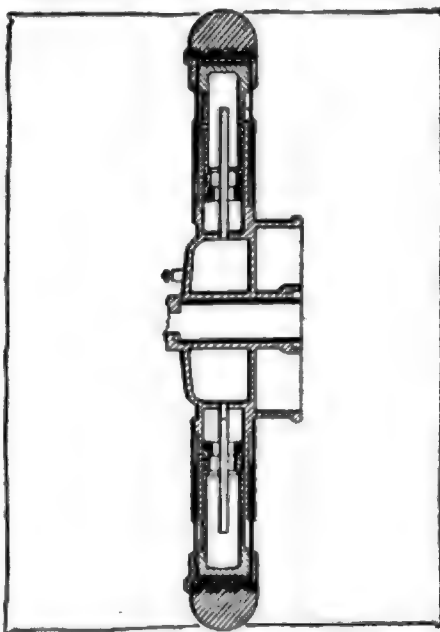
AUSTRIAN PNEUMATIC WHEEL.
